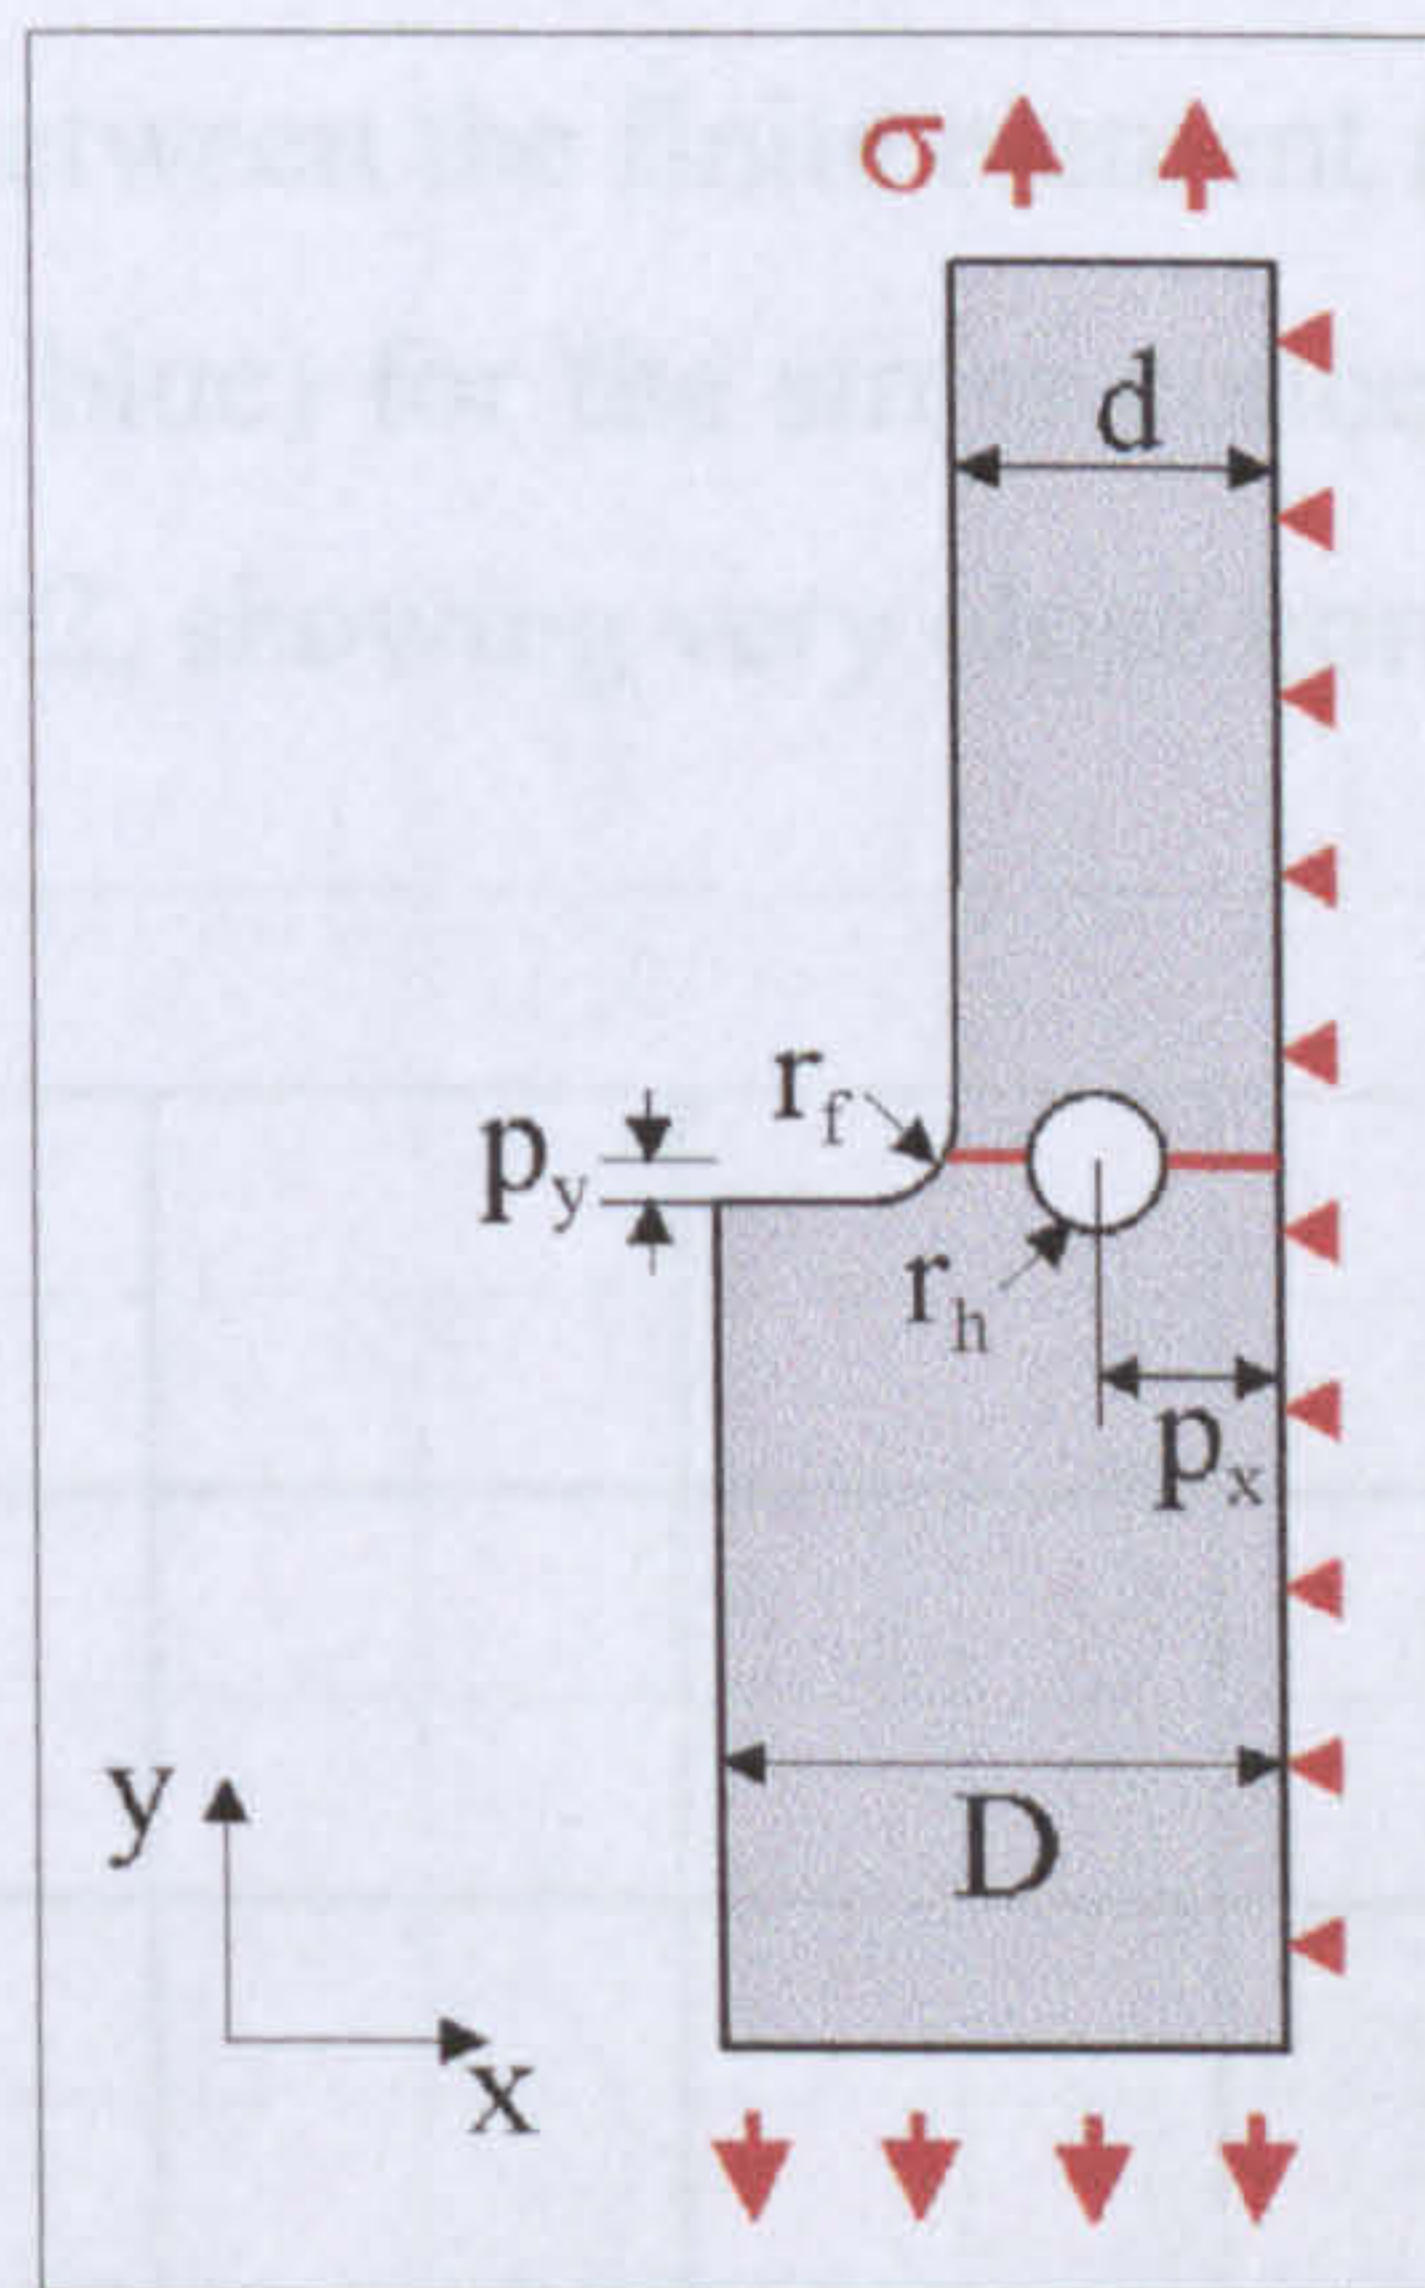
Geometric parameters involved in the problem of a hole placed in proximity to a single shoulder fillet
